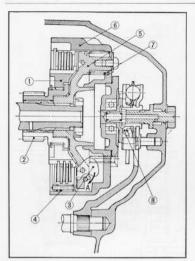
63 B Clutch mechanism C 90, CT 90
